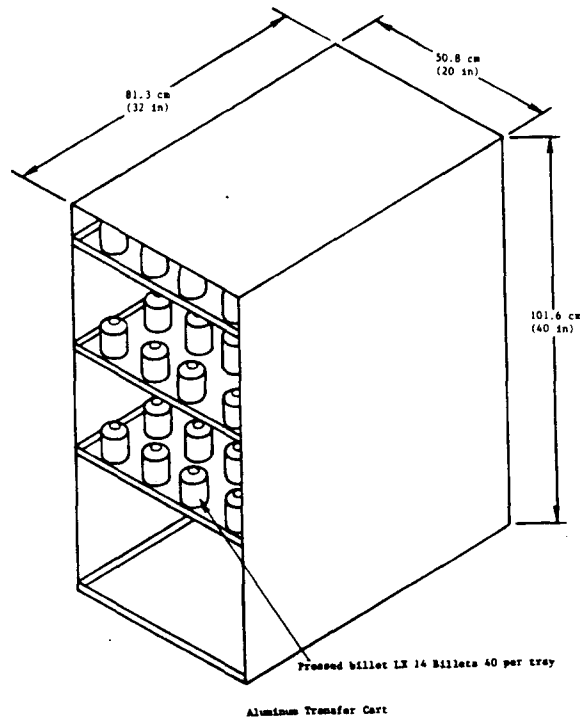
Aluminum Transfer Cart Test for Pressed Billets.
